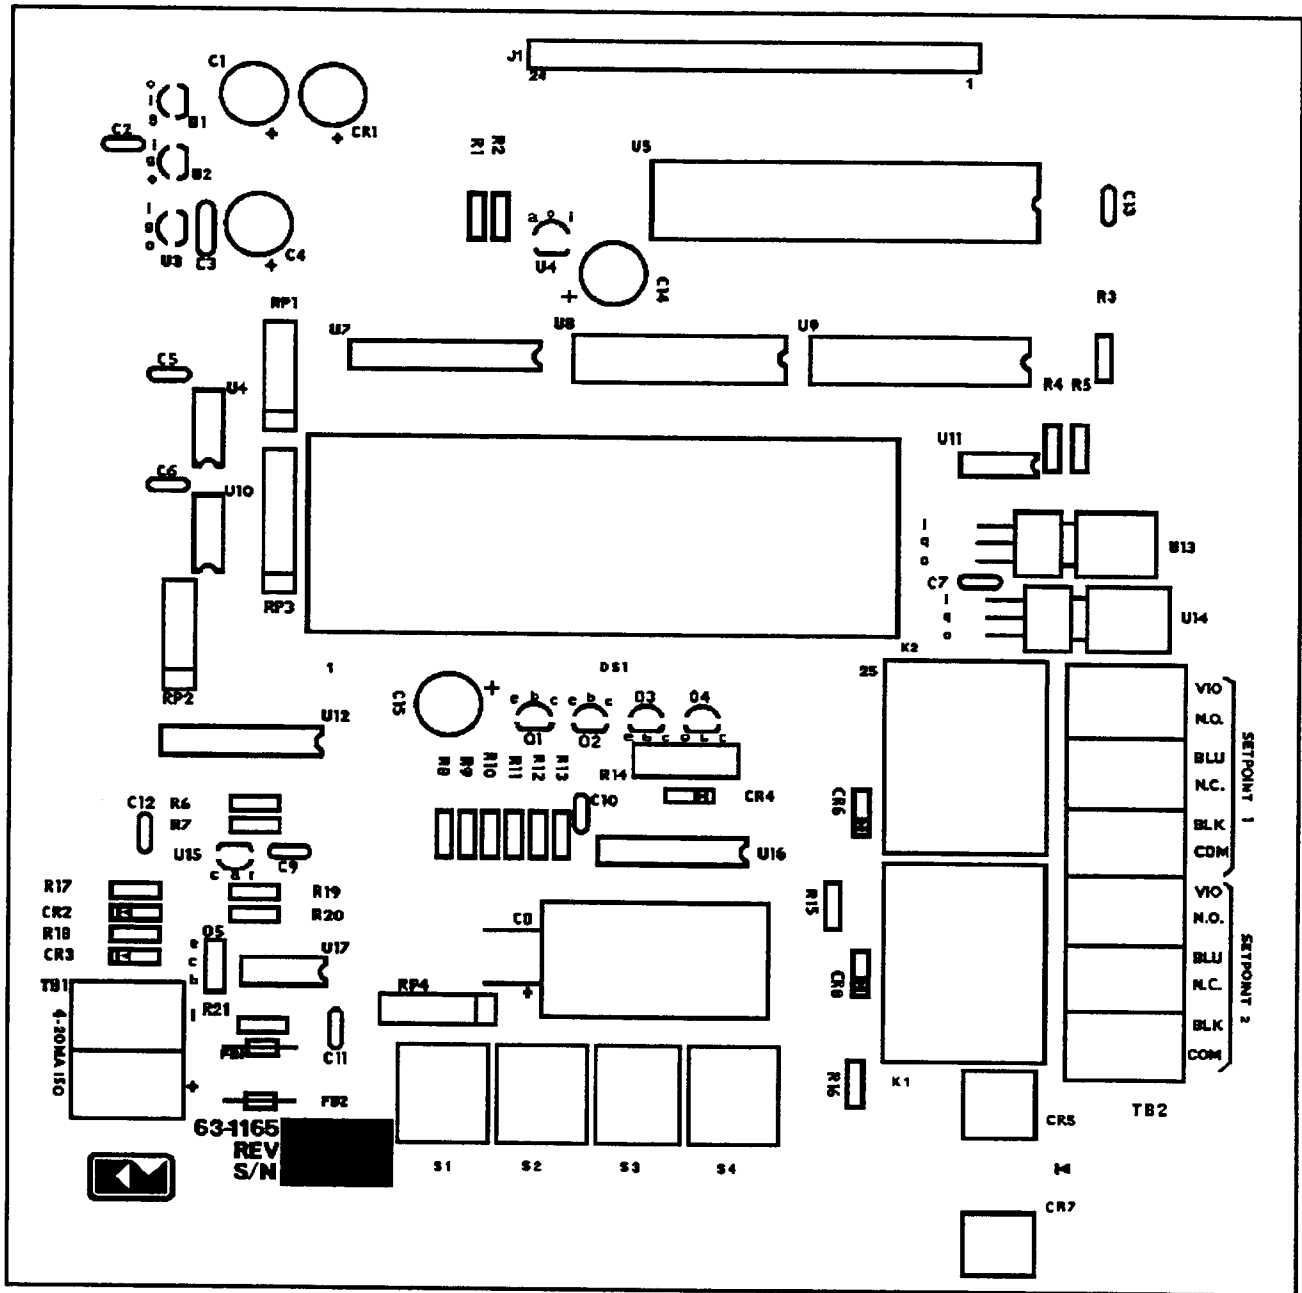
Assembly Drawing of the Display Board, P/N 63-1165.
